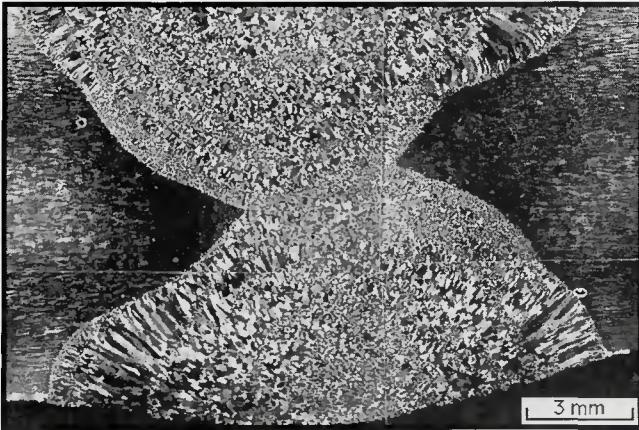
Weldment cross-section (filler metal 5Cu-1Li).
